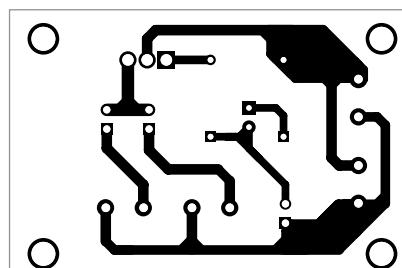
Actual-size PCB pattern of the dusk-dawn controller
